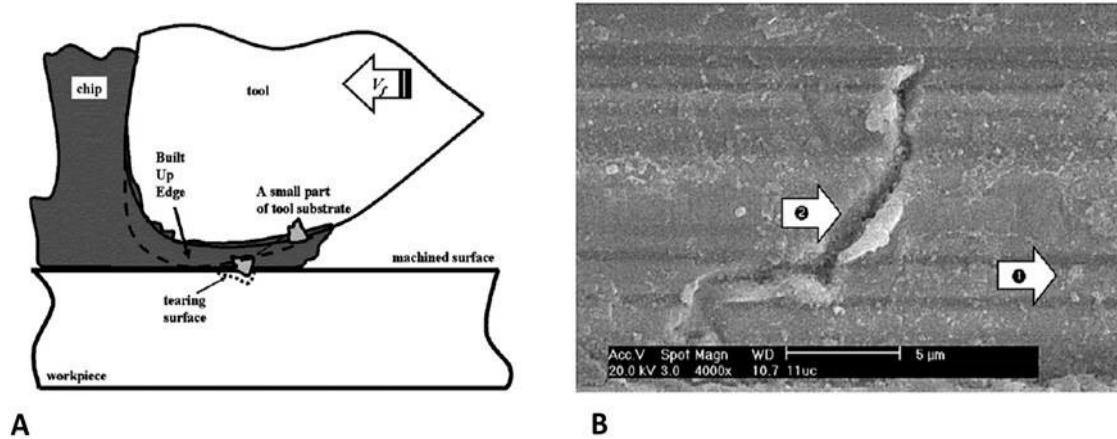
(A) The proposed mechanism of tearing surface, (B) tearing surface defect [80].
